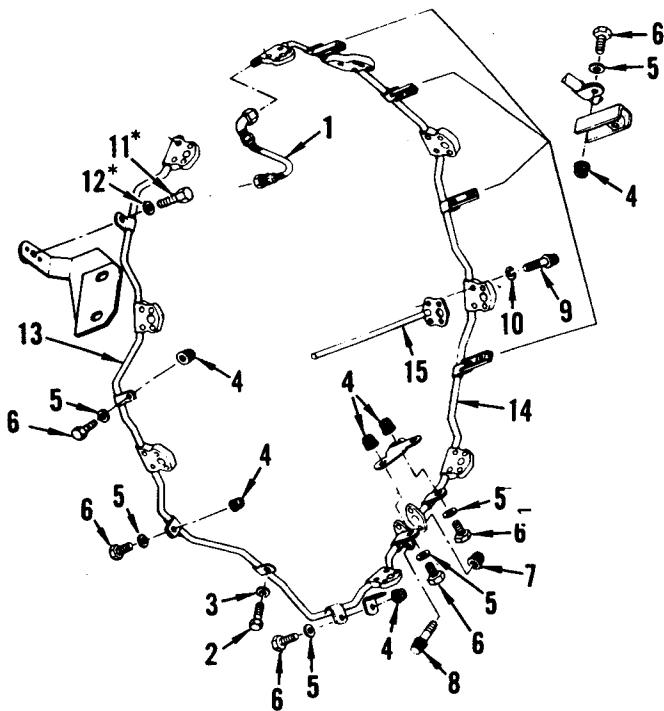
Removal and Installation; Turbine Outlet Pressure Transmitter
